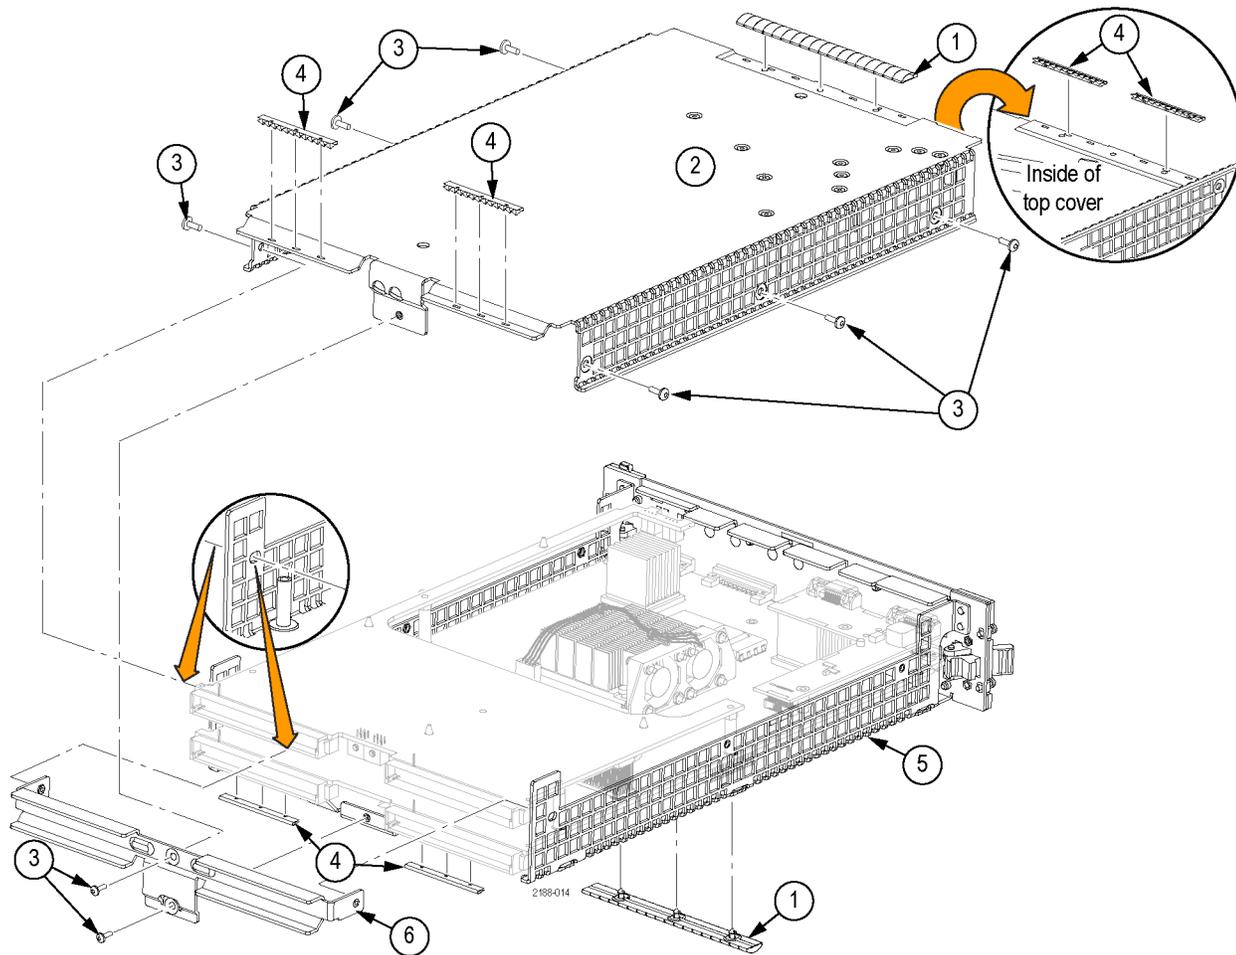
TLA7S08 & TLA7S16 chassis and cover
